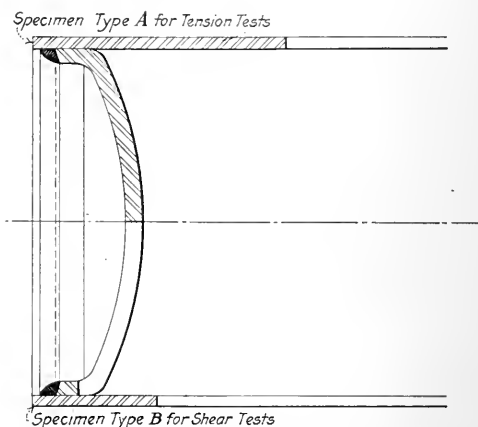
FORM OF SPECIMENS SUBJECTED TO SHEAR AND FLEXURE
